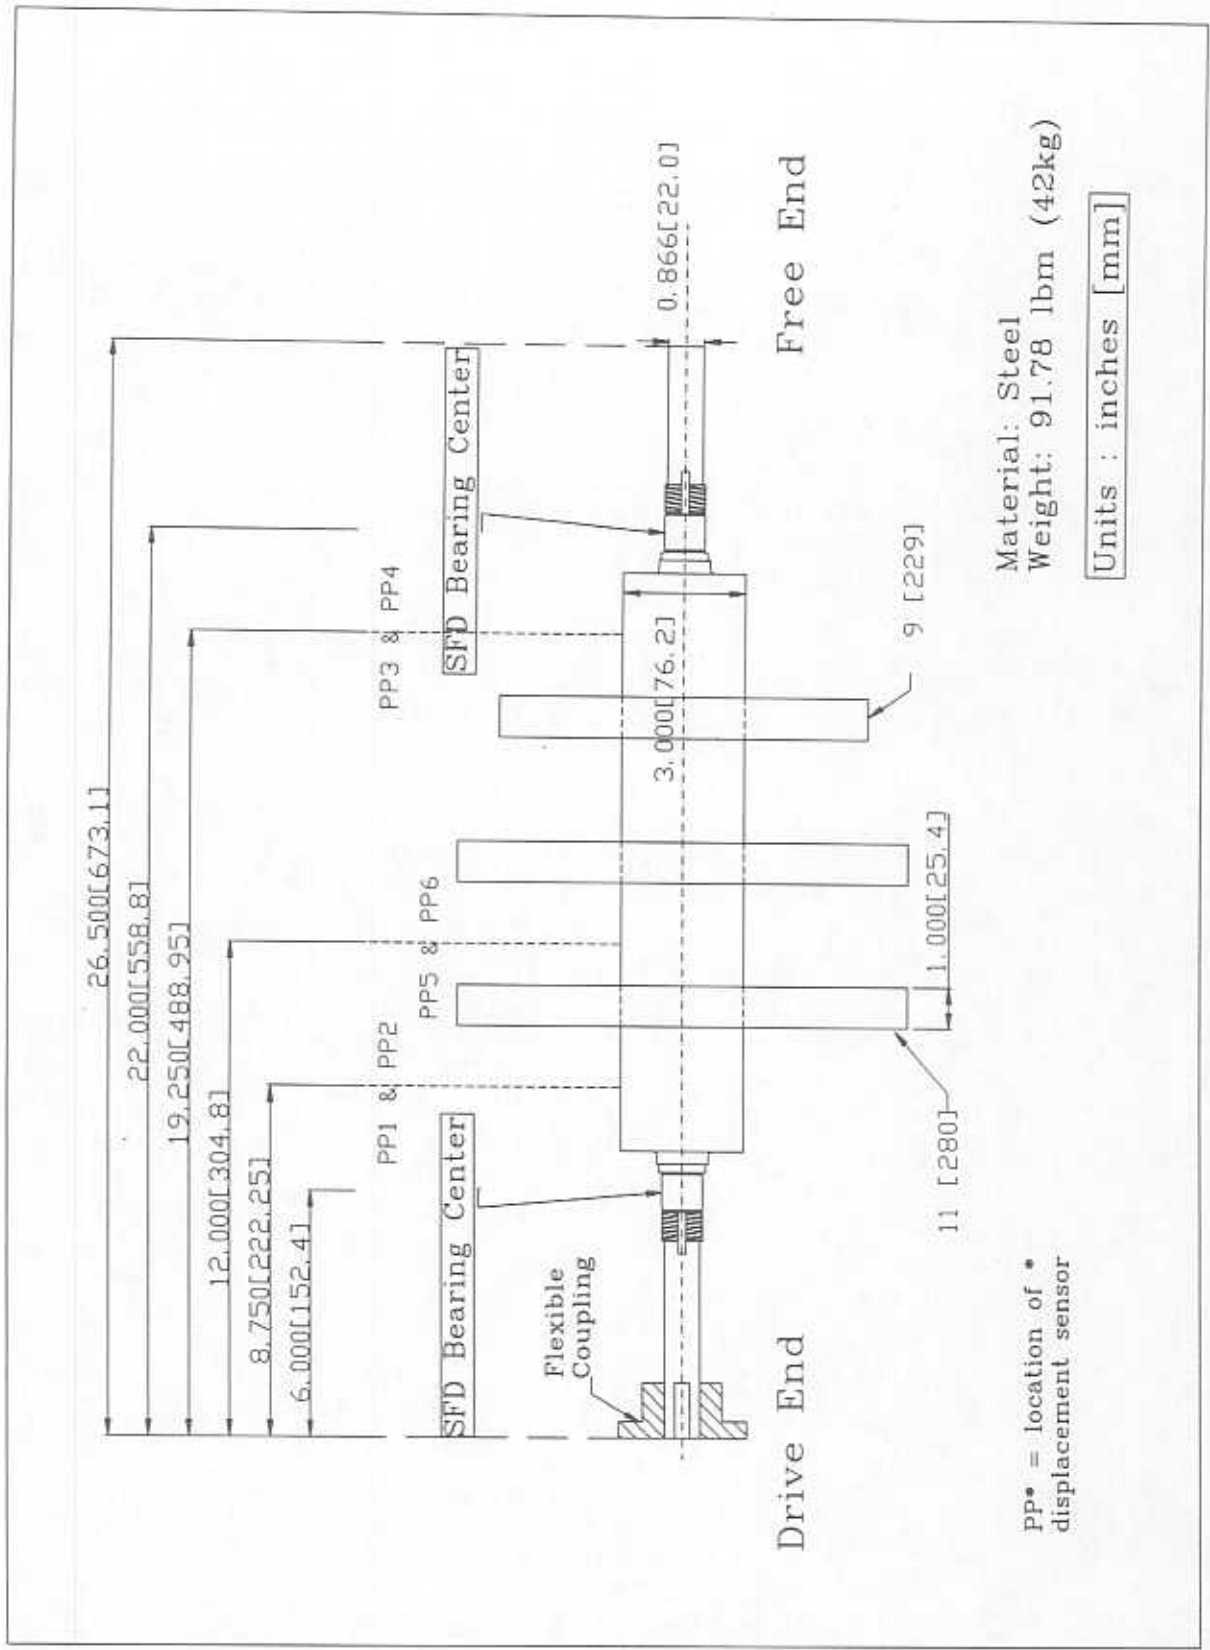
Test rotor dimensions and distances to bearing supports and displacement sensors
